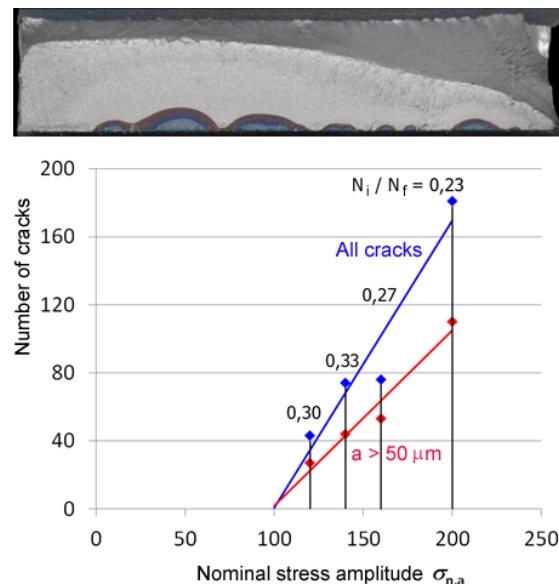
Number of cracks along the 50 mm weld toe of butt welds [20], visualised by heat-tinting and illustrated on top by an example of observed crack fronts
